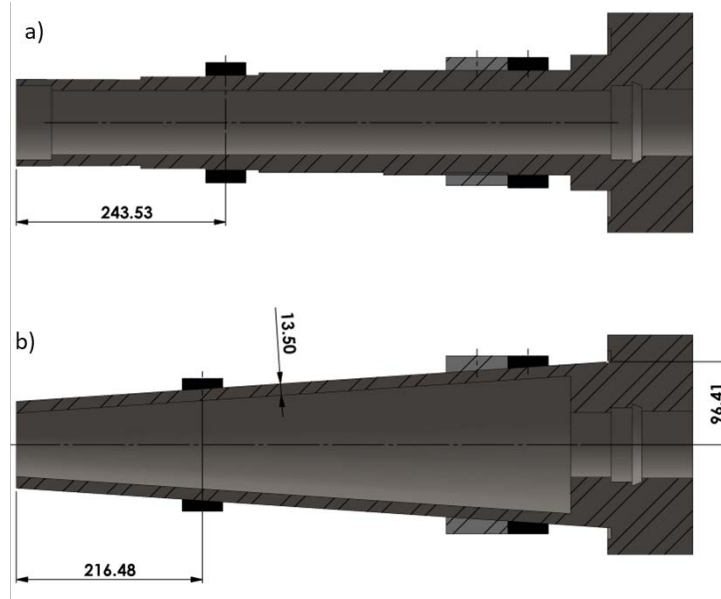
a) The remodeled spindle unite in [10], b) The optimized spindle unite.
